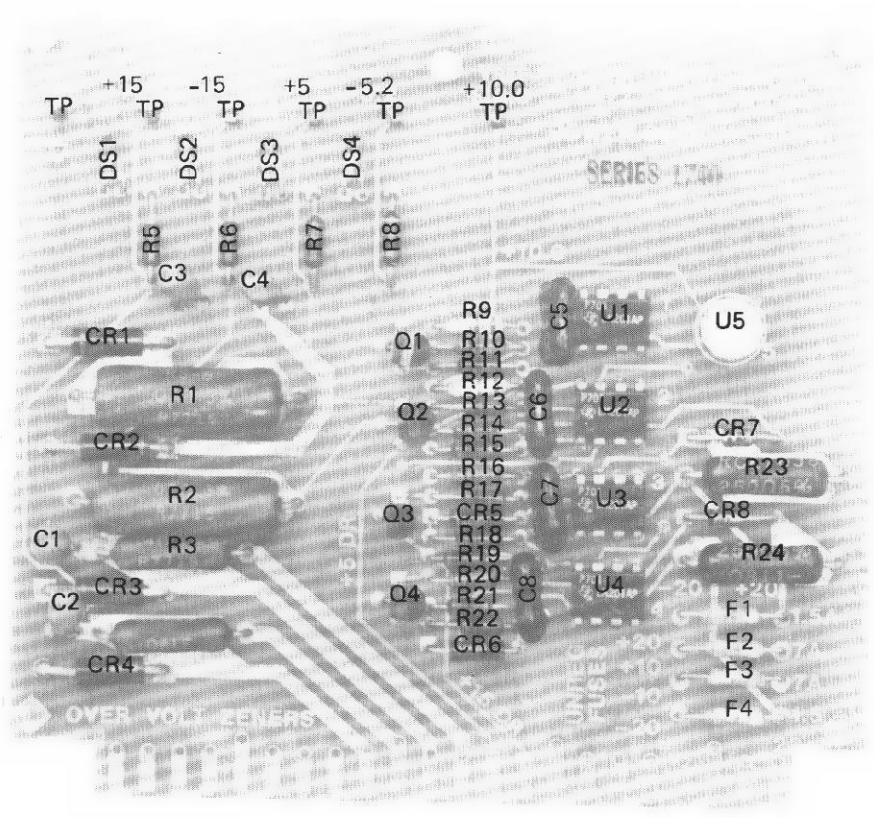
A1/A2/A6 Motherboard/Power Supply Assembly
